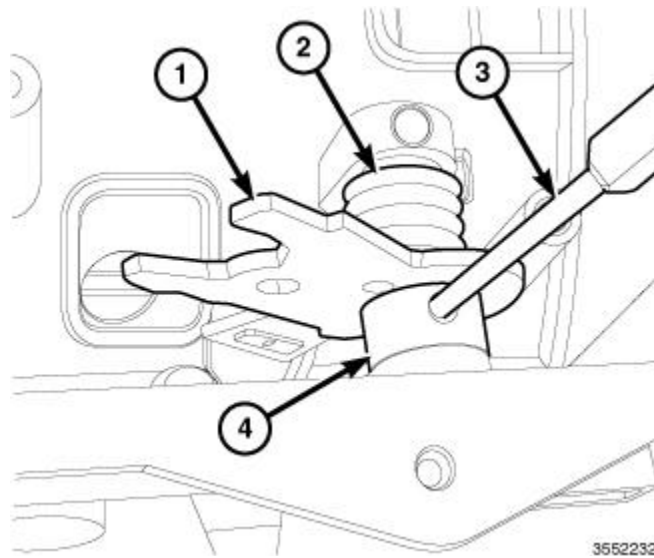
Selector Shaft, Suitable Pin Punch, Spring & Fork
